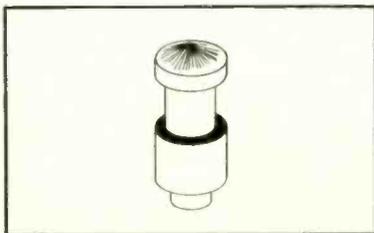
Guidepost used in conjunction with "outboard" head mounting.
